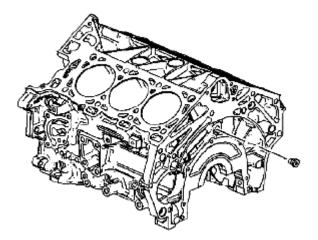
Identifying M14 Left Side Coolant Drain Threaded Plug Courtesy of SUZUKI OF AMERICA CORP.
